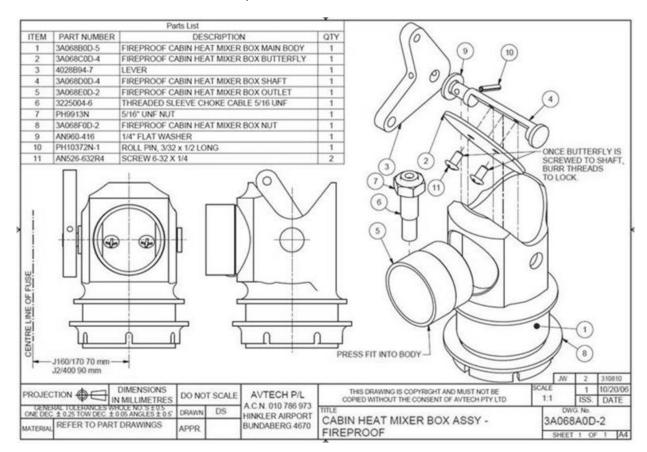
Cabin Heat Mixer Assembly (all J-Series)
